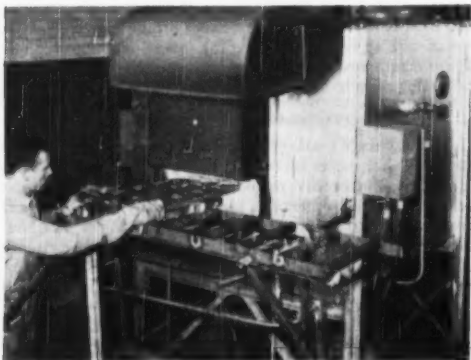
STEEL PULLEYS READY FOR BRAZING, ARE PUSHED INTO HEATING CHAMBER OF BOX-TYPE FURNACE
